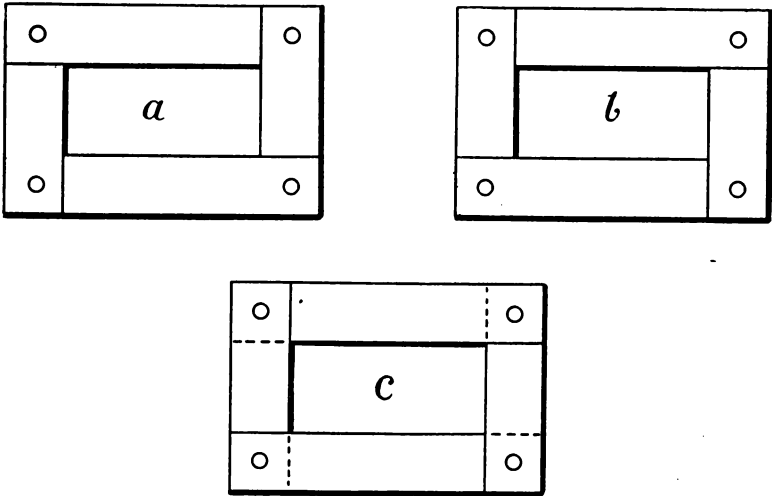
METHOD OF ASSEMBLING STAMPINGS.
